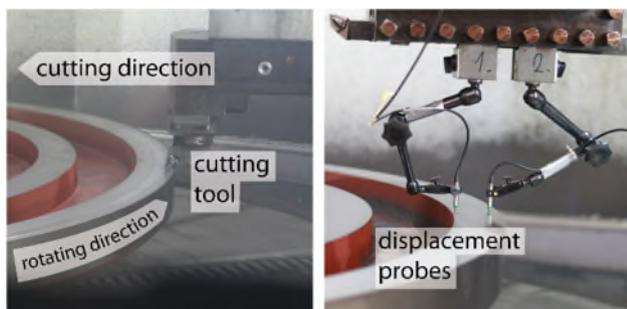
Testing workpiece manufacturing (left) and measuring (right)
